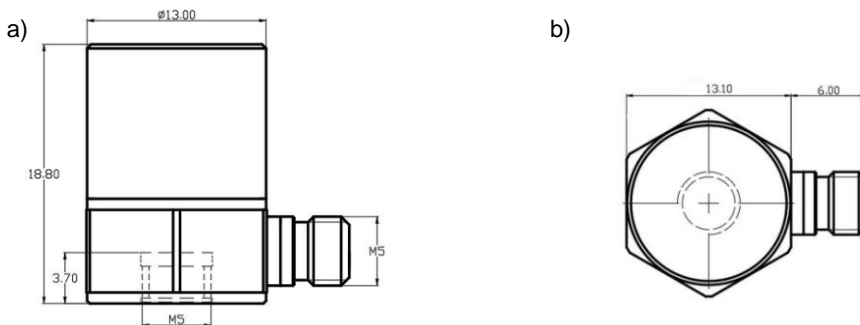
Mechanical dimension SSA-P8UCA2 a) side view b) top view
